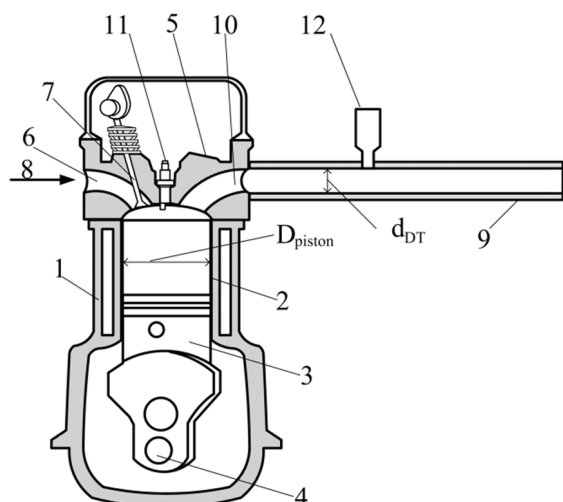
Diagram of the PCD-gun: 1 — piston-type compressor; 2 — cylinder; 3 — piston; 4 — crank mechanism; 5 — head of the compressor; 6 — intake branch tube; 7 — valve; 8 — fuel feed system; 9 — barrel; 10 — branch tube; 11 — spark plug; 12 — powder feeder.
